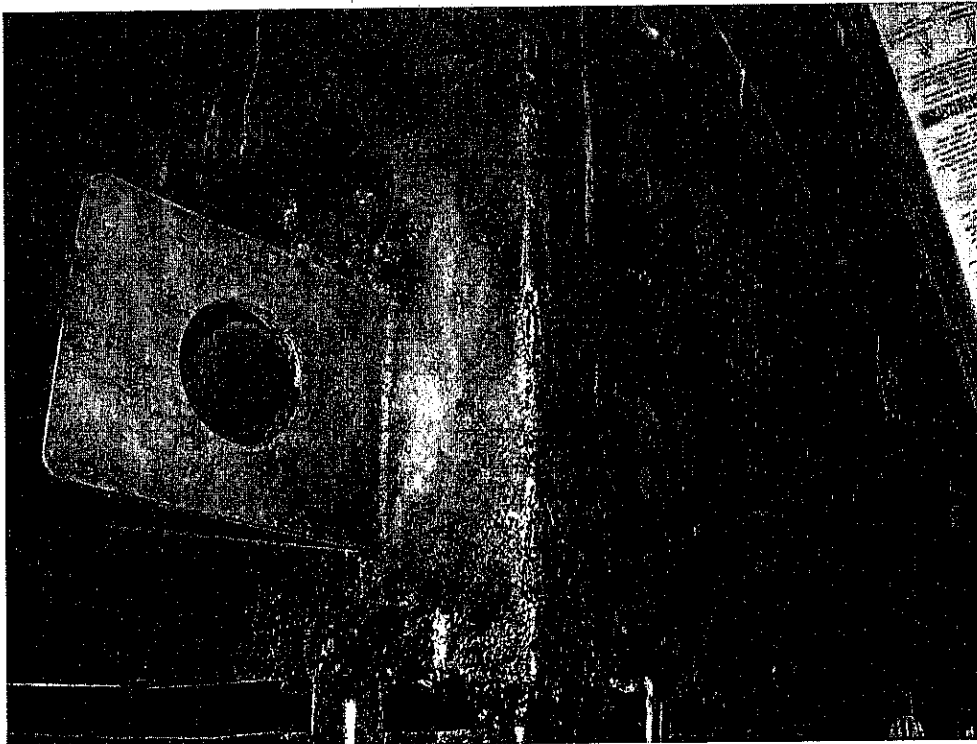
View of holes in the wall-to-wall joint of the air stripper
